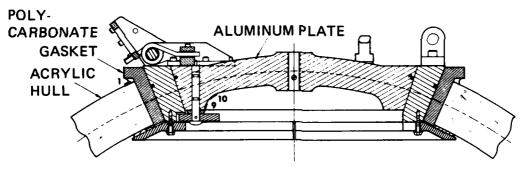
Location of electrical resistance strain gages on model 2000B assembly.
